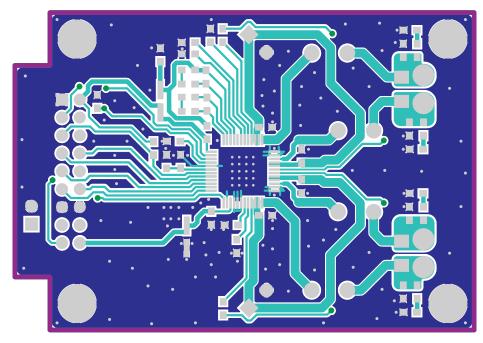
TAS5709EVM (TAS5707EVM) Top Copper Assembly
